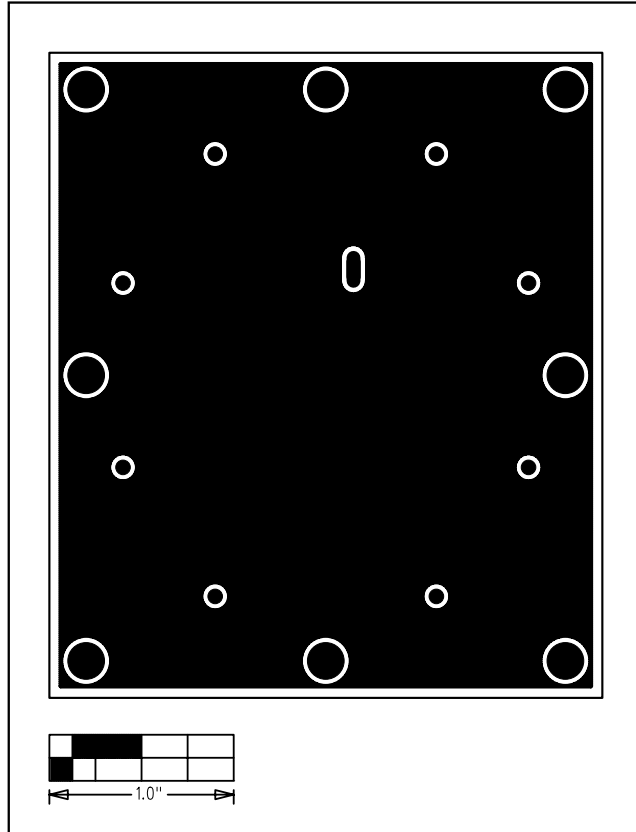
MAX9589 EV Kit PCB Layout—Solder Side
